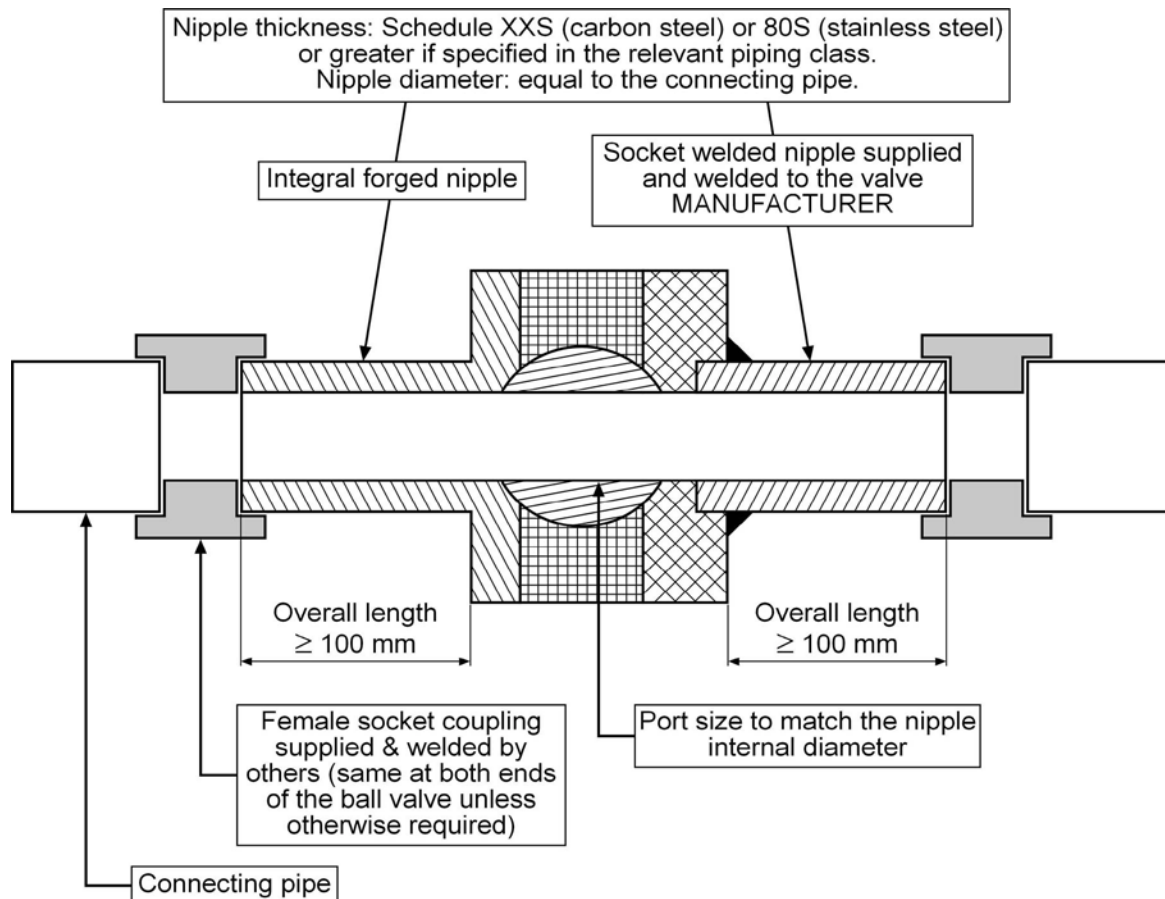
Typical requirements for nipples on socket-welded end ball valves
